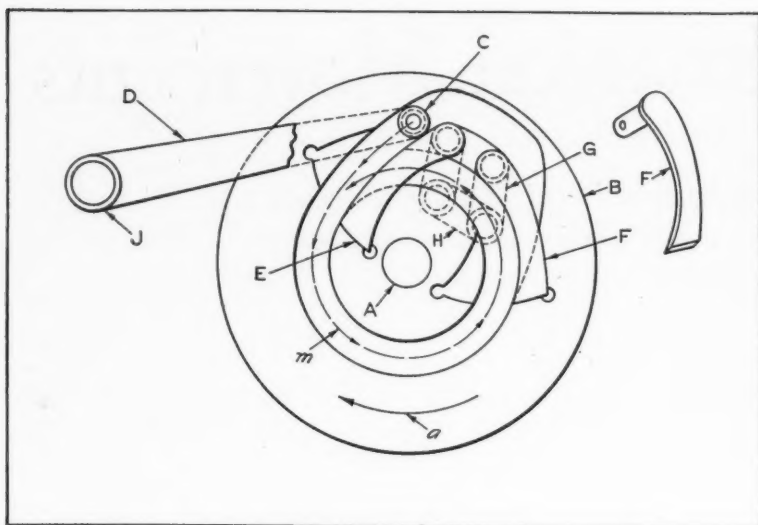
Cam Mechanism with Levers E and F Set to Guide Roller C into Concentric Groove
